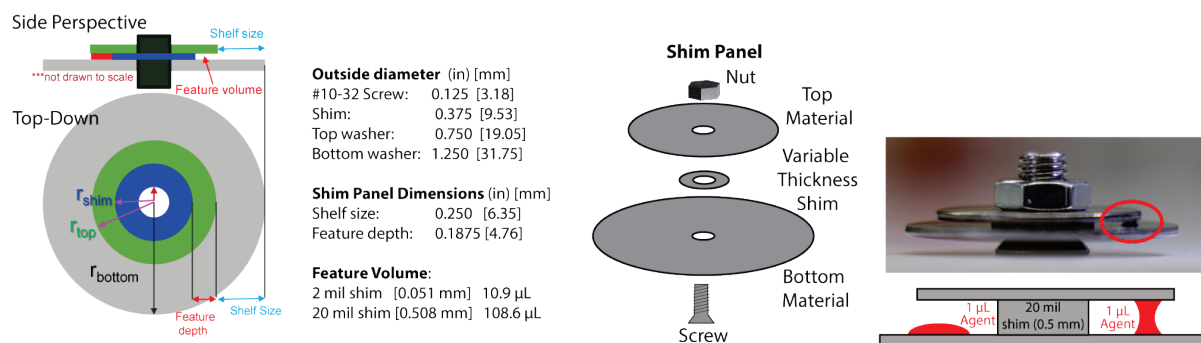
Shim panel shown with dimensions (left) and exploded (middle); and image of contaminated steel panel with 1 μL of liquid contaminant (right). Droplets may or may not bridge the top and bottom materials.
